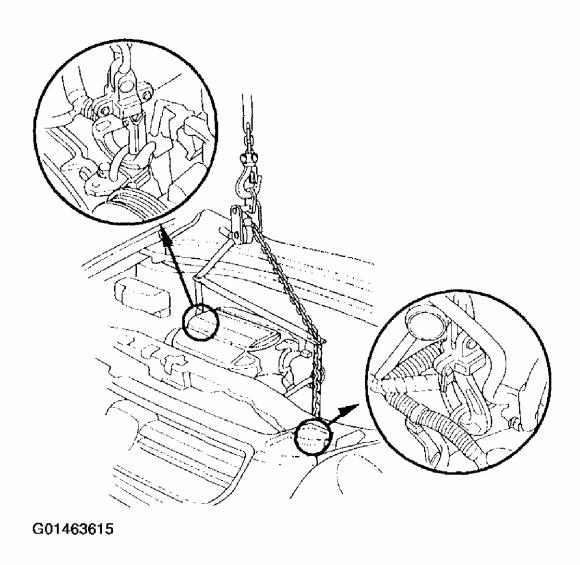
Attaching The Chain Hoist To The Engine Courtesy of AMERICAN HONDA MOTOR CO., INC.
